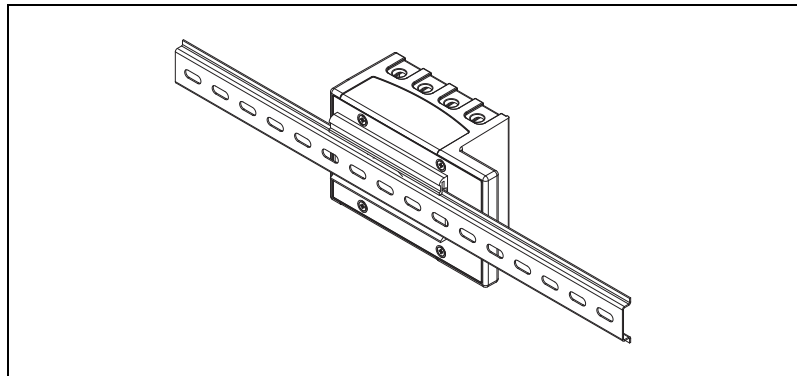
Mounting the DIN Rail to the L Brackets of the Slide Assemblies
